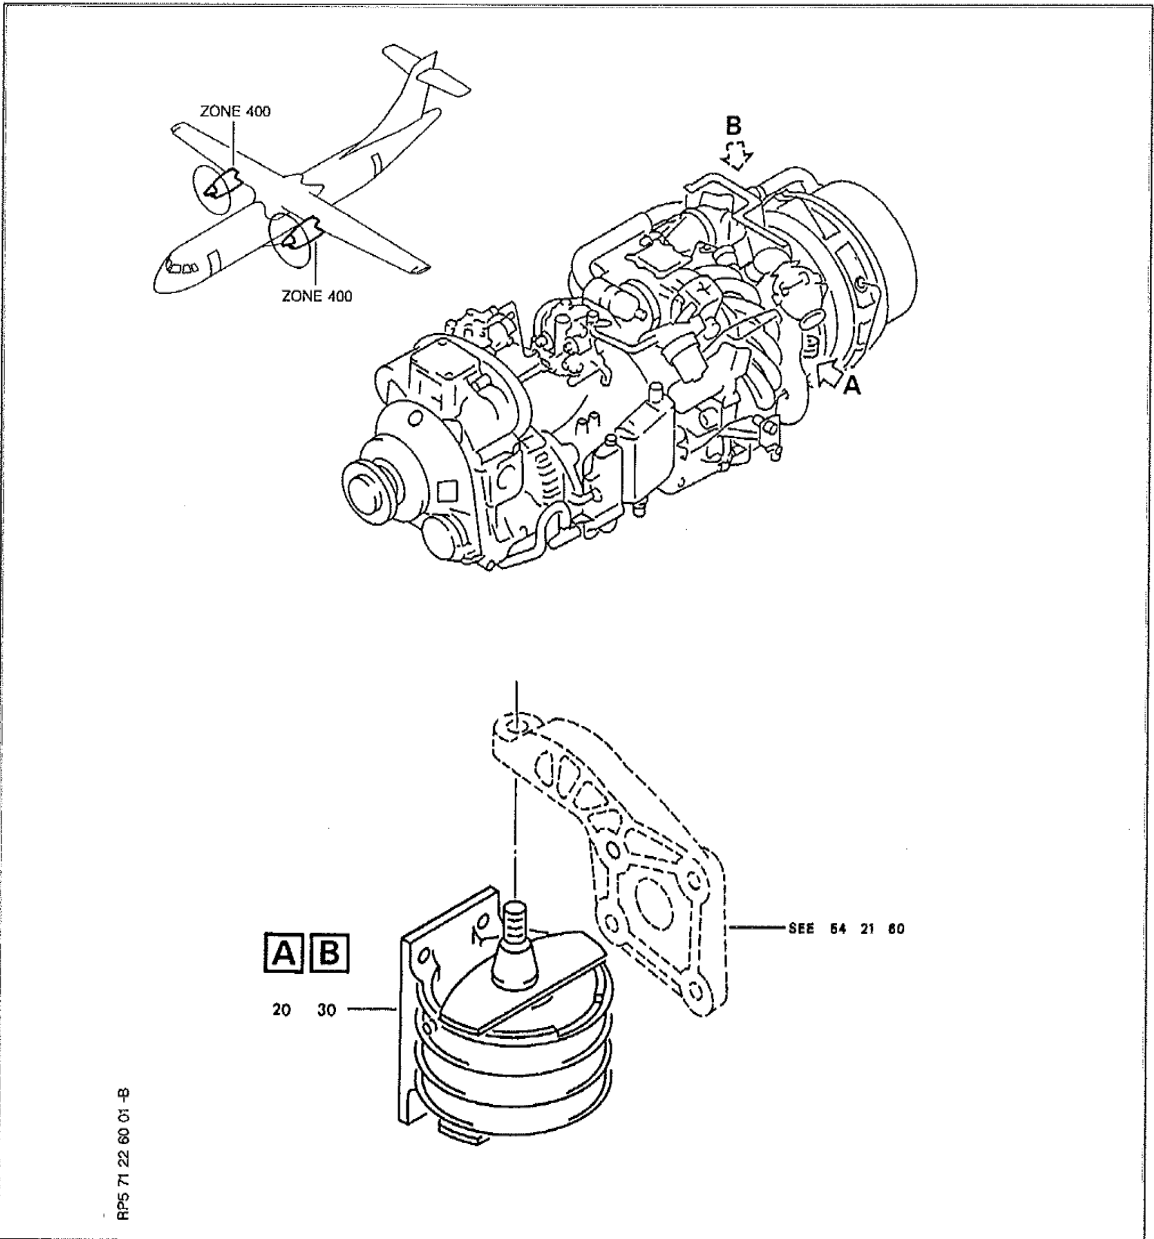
/ 71-22-60 SHOCKMOUNTS INSTL-SIDE REAR,Z400
